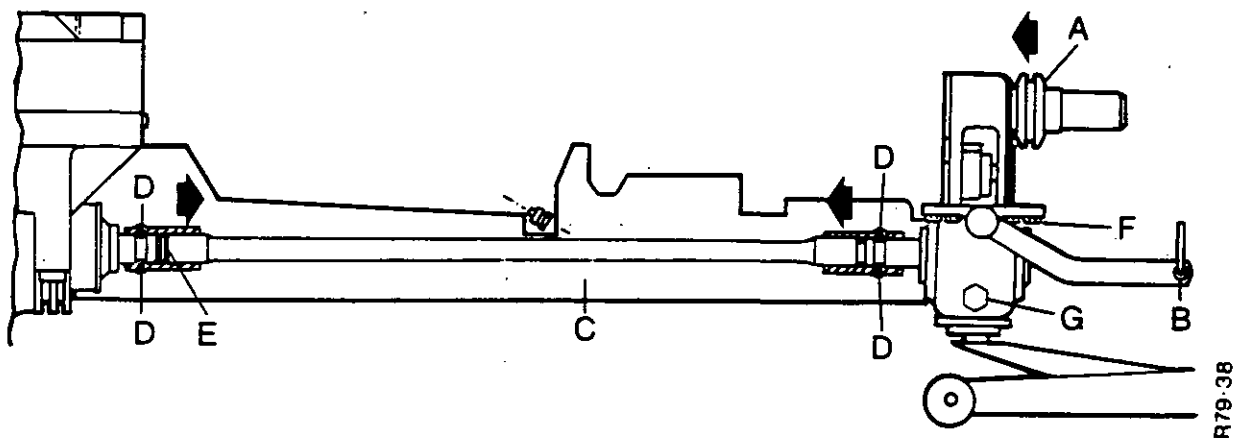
TRANSFER GEARBOX REMOVAL AND INSTALLATION
